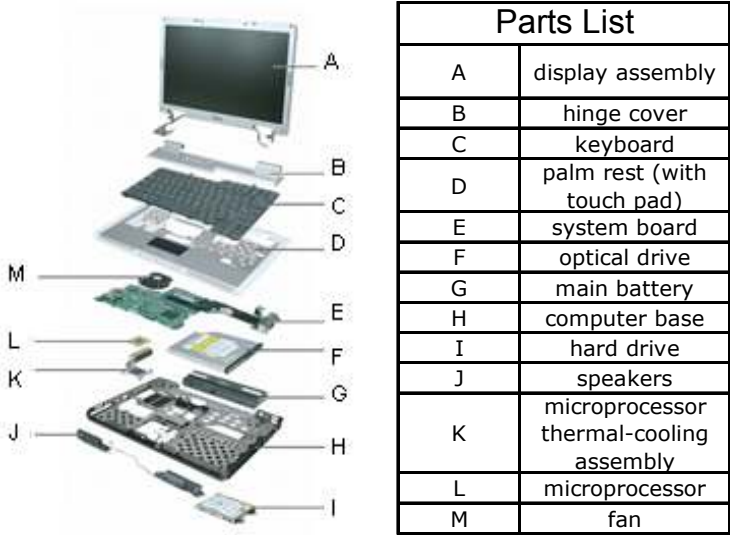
Exploded view of dell laptop and parts list (Hu et al., 2013)
